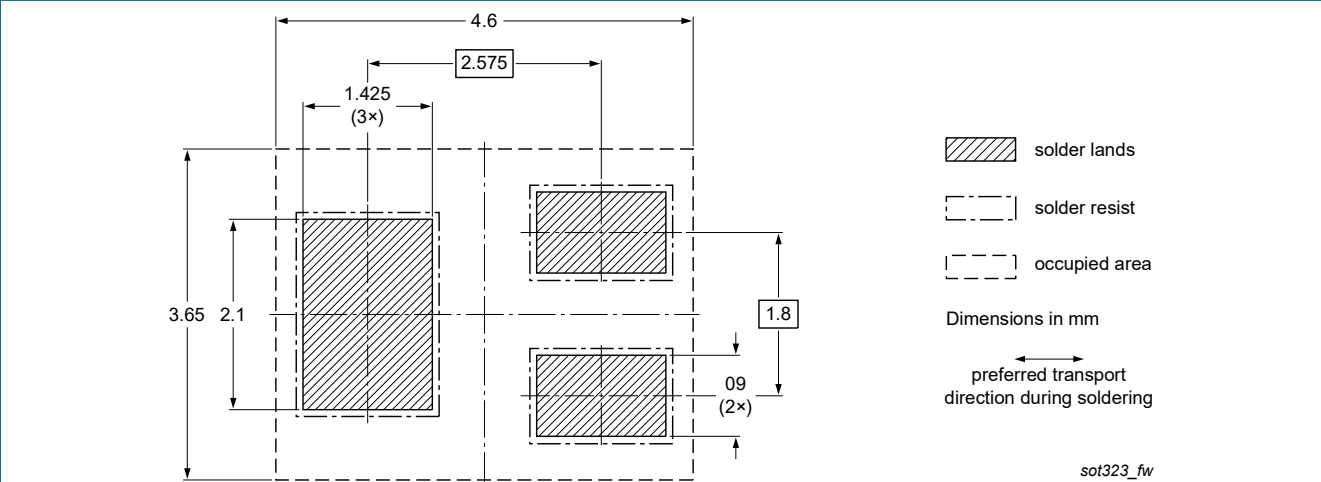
Wave soldering footprint for SC-70 (SOT323)
